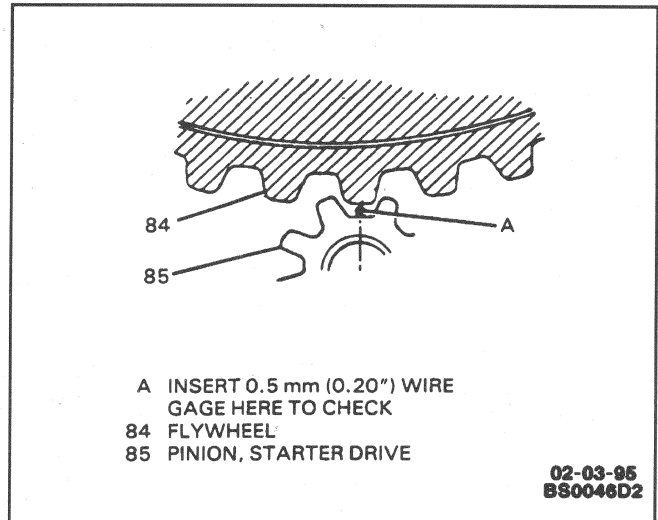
Measuring Flywheel-to-Pinion Clearance
